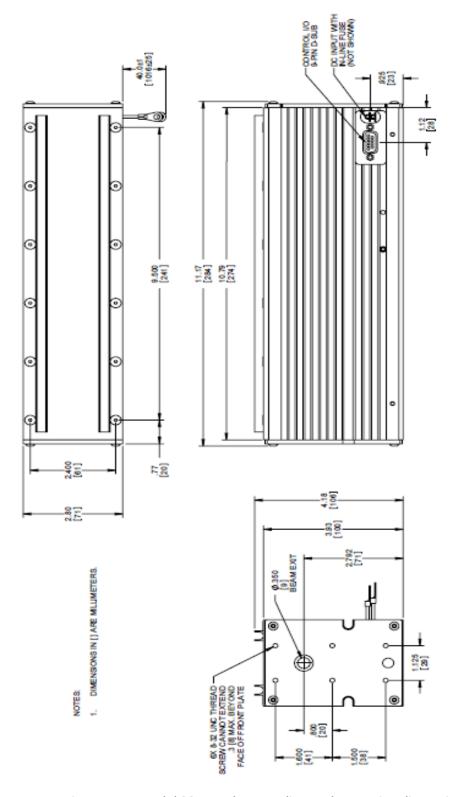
Model 32-1 package outline and mounting dimensions, 1 of 1.
